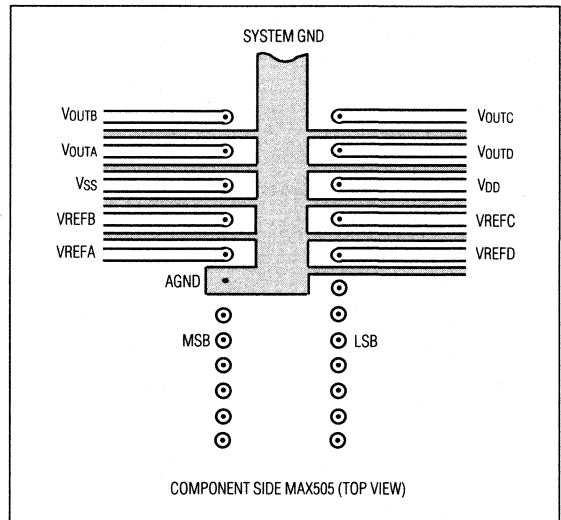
Suggested MAX505 PCB Layout for Minimizing Crosstalk
